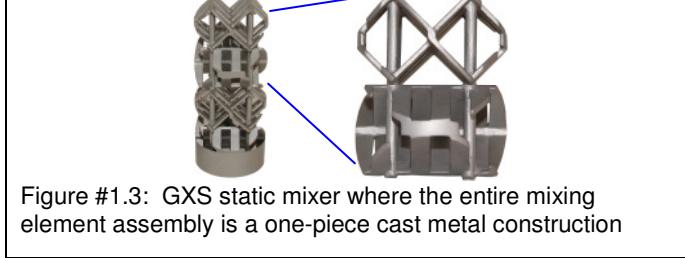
GXS static mixer where the entire mixing element assembly is a one-piece cast metal construction
